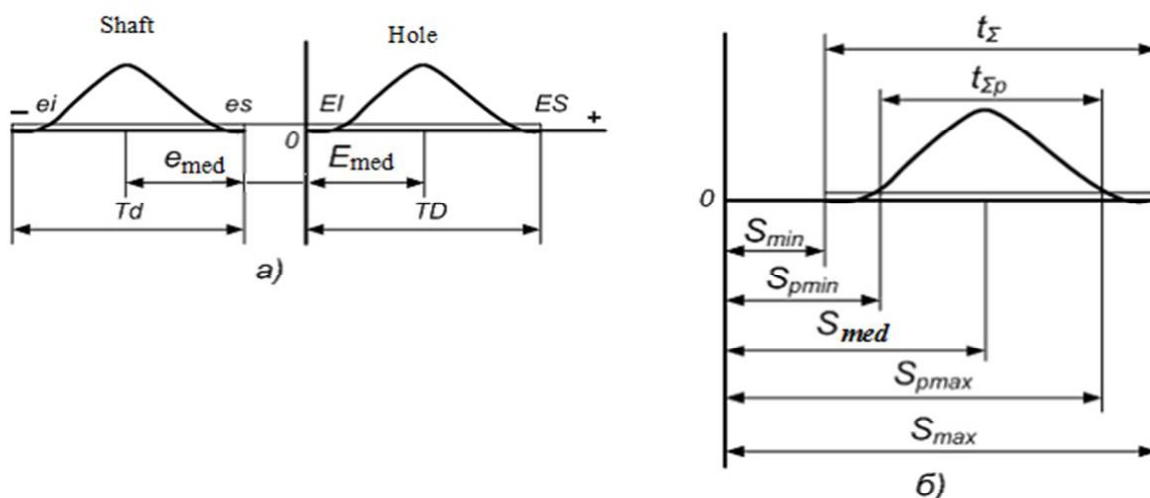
Location of admittances fields hole and shaft dimensions boarding with a gap.
